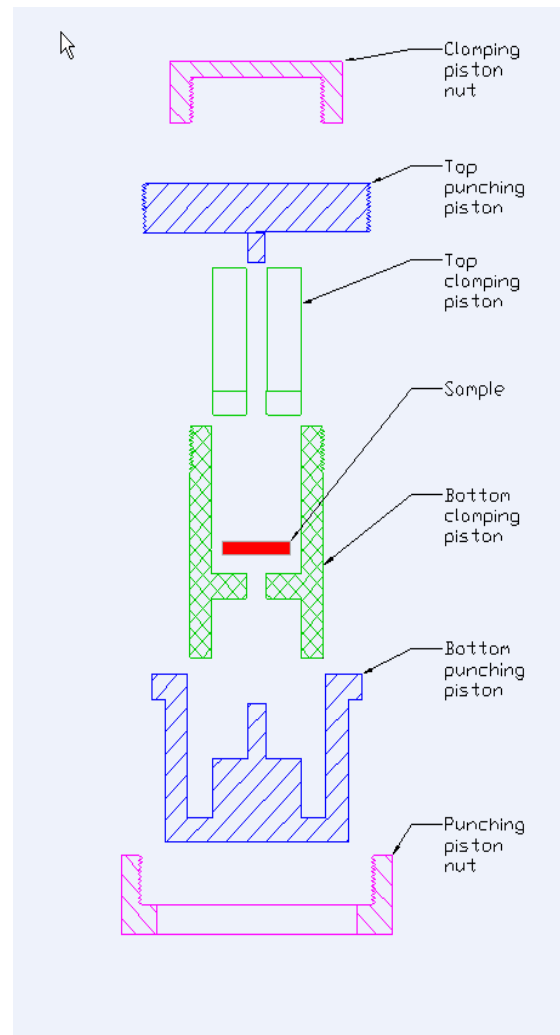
1 Drawing showing the parts making up to the puncher tool (Stenebråten et al., 2008)
